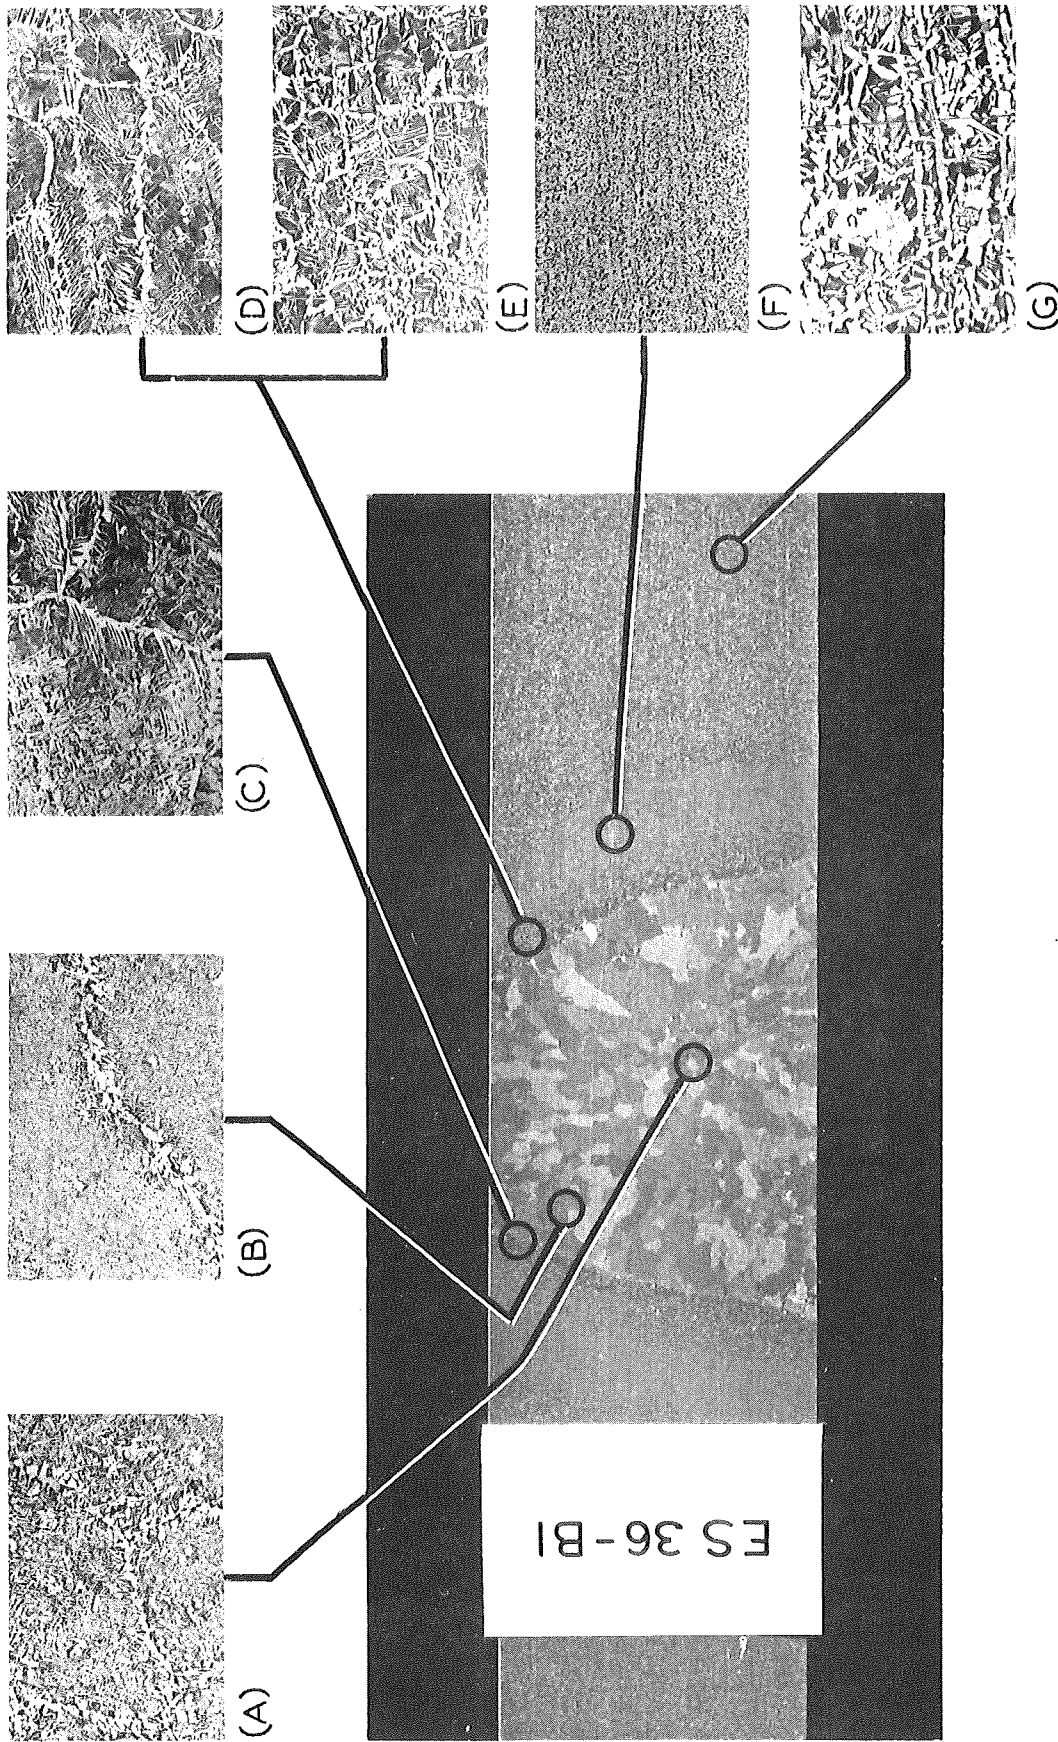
Dry shoe electroslag weld made by Fabricator B on 1-3/4-in. A 36 steel. Microstructures shown are: A) Zone 2 weld metal in center, B) Zone 2 weld metal near edge, C) fusion line (HAZ 1 on the right), D) HAZ 1 beyond fusion line, E) HAZ 1 further out, F) HAZ 2, G) unaffected base metal. (Microstructures at 100x, etchant 3 percent nital.)
